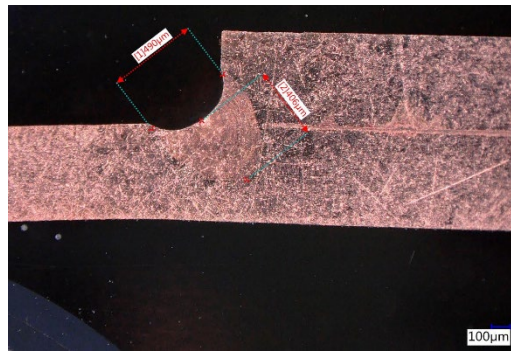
Bus bar weld performed with the AO-500 and the Blue Weld processing head operating with a 215  $\mu\text{m}$  spot size.
